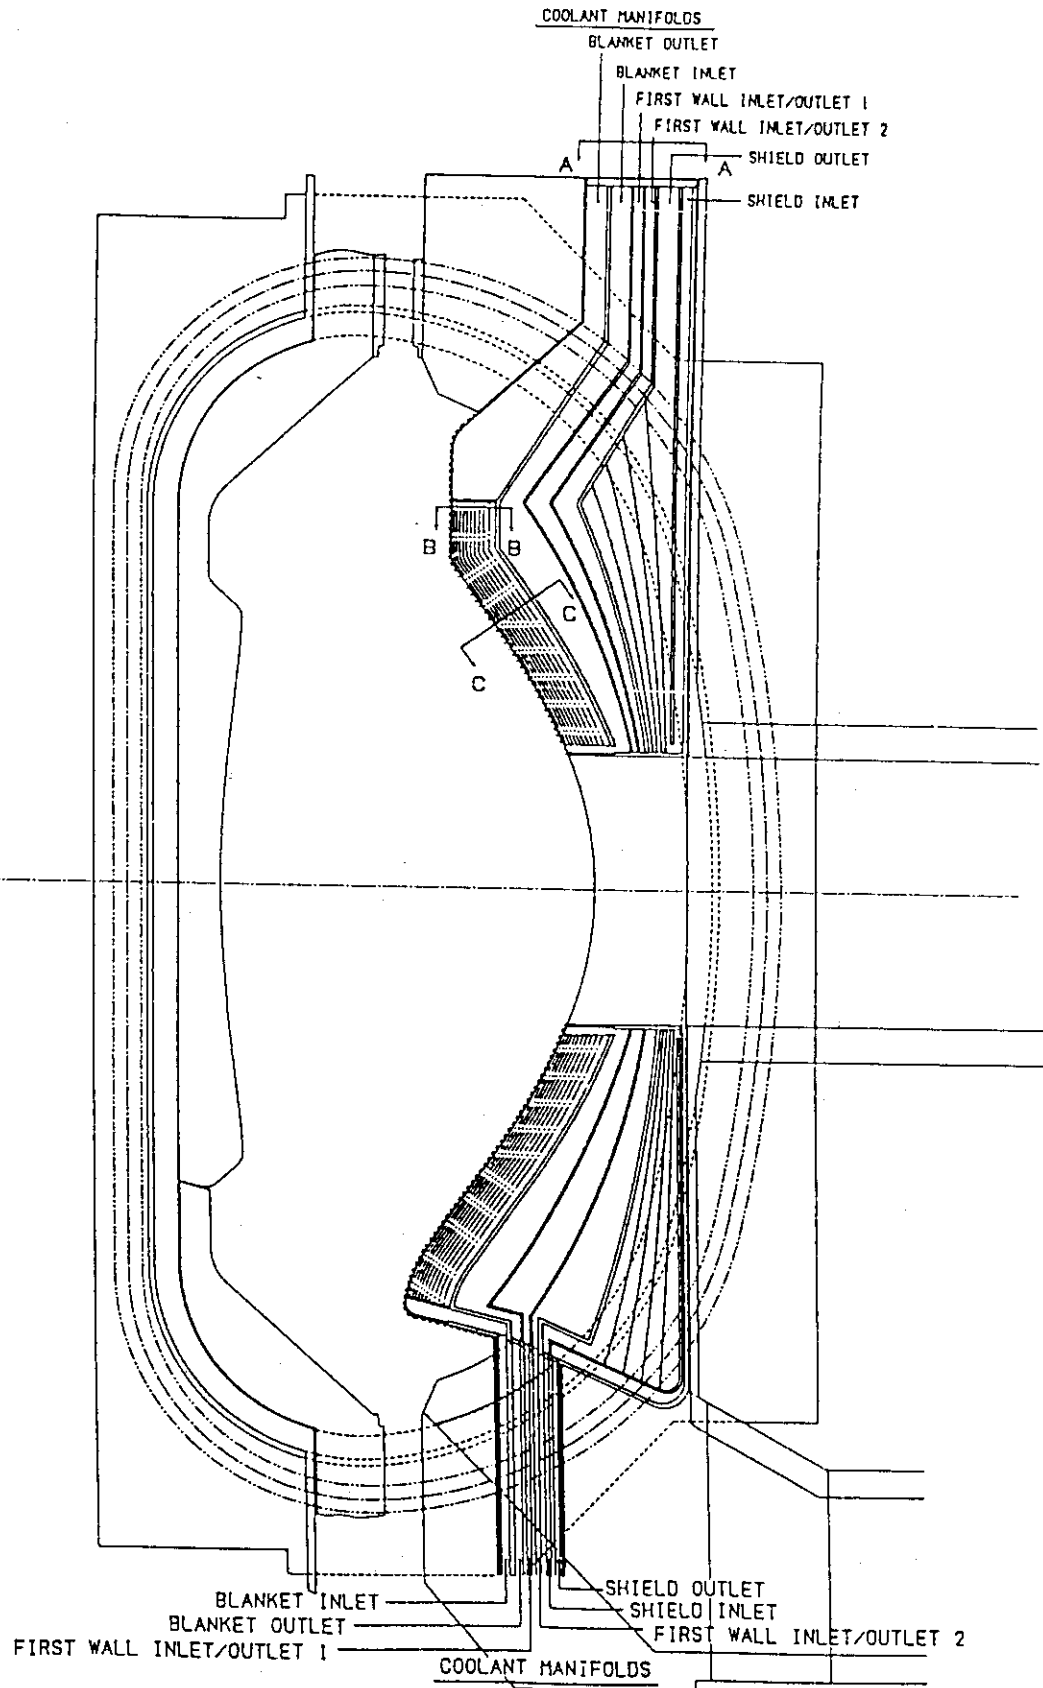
Elevation view of outboard central module (mixed pebble blanket)
